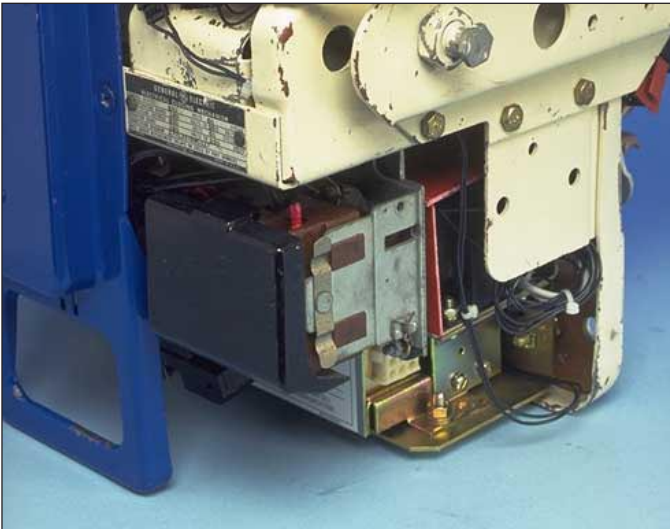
Overview – Aux. CT Module Assembly Installed in the Breaker
